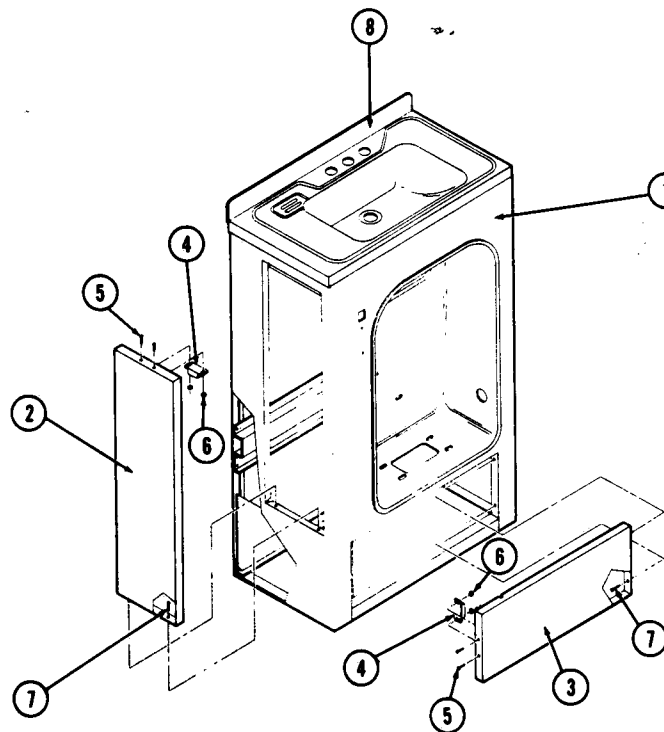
CABINET BODY ASSEMBLY: Model H224 (BA08).
